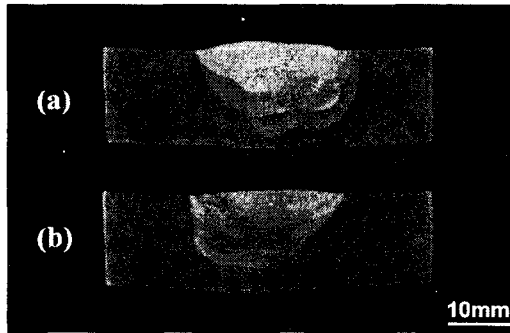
Macro-structures of repair welds by direct deposition of weld metal made by (a) SMAW and GTAW.
